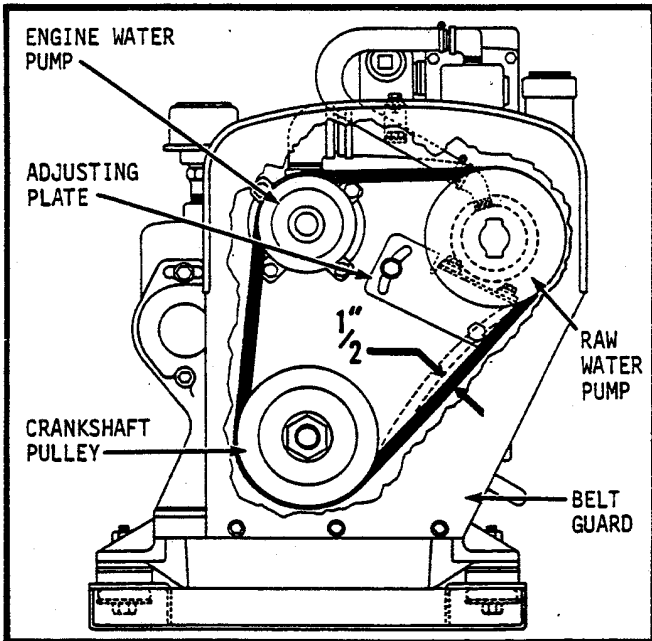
BELT ADJUSTMENT - MARINE
